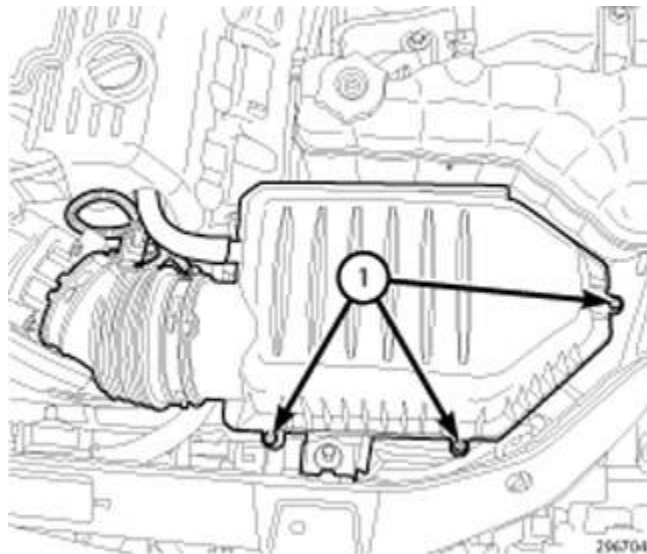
Air Cleaner Housing Cover Retaining Screws
